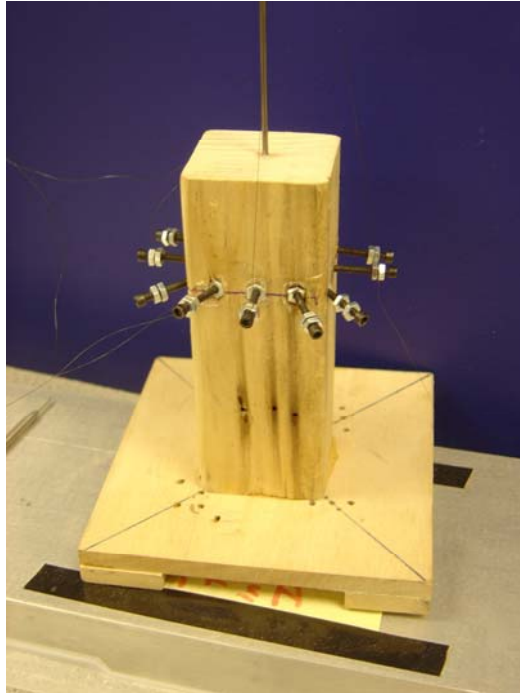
Finished Base Assembly with Tensioning Screws
